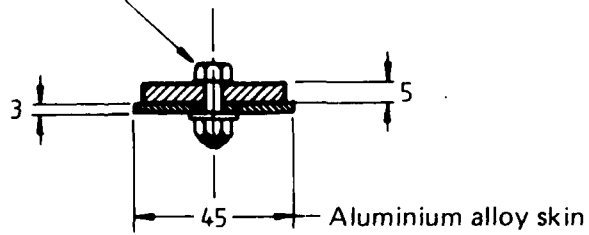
SIMULATION SPECIMEN – HOLE 18
